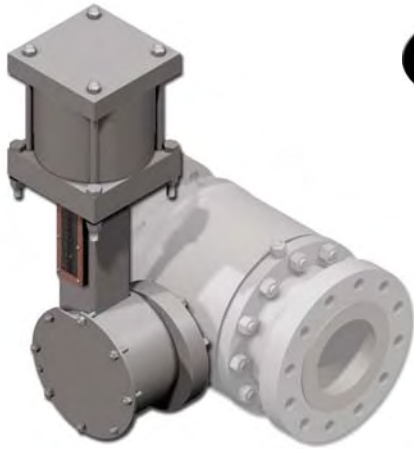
Becker RPDA Rotary Piston Double Acting Actuator
